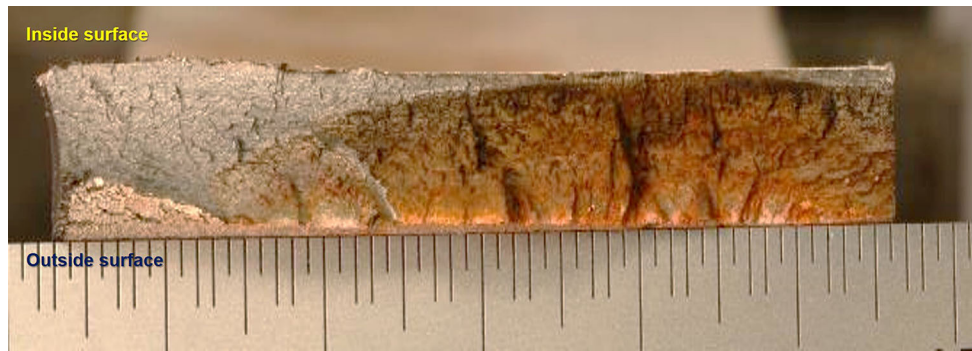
Opened fatigue crack from the dented pipe after cyclic hydraulic testing
